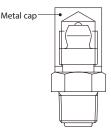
Location of Grease Fill and Discharge Port (Example: Bevel BUDDYBOX 4 Series LHYM-Y4) Figure 8-14 Location of Grease Fill and Discharge Port (Example: Helical BUDDYBOX EHYM-Y3) Figure 8-15 Grease Fitting with Metal Cap
